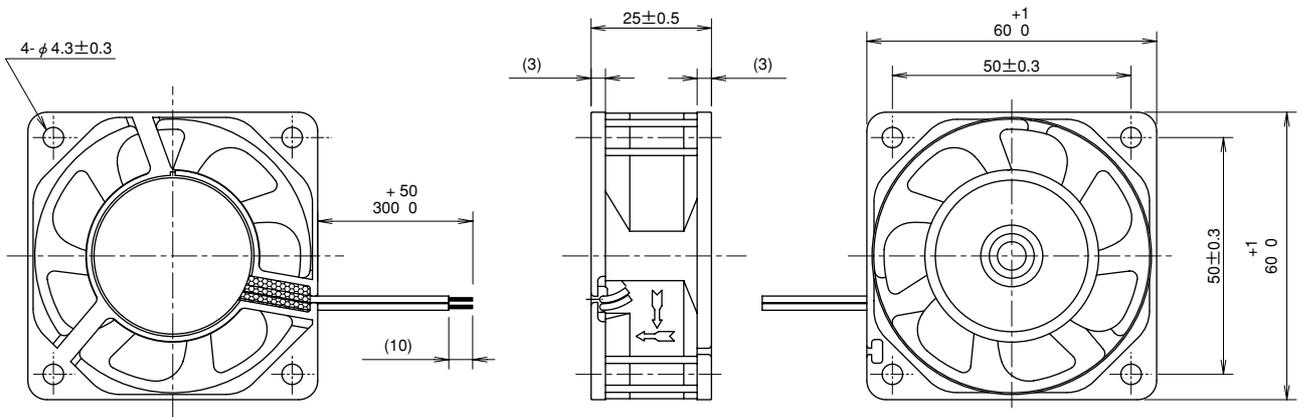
Dimensions of the Oil Proof Fan, "San Ace 60WF"
